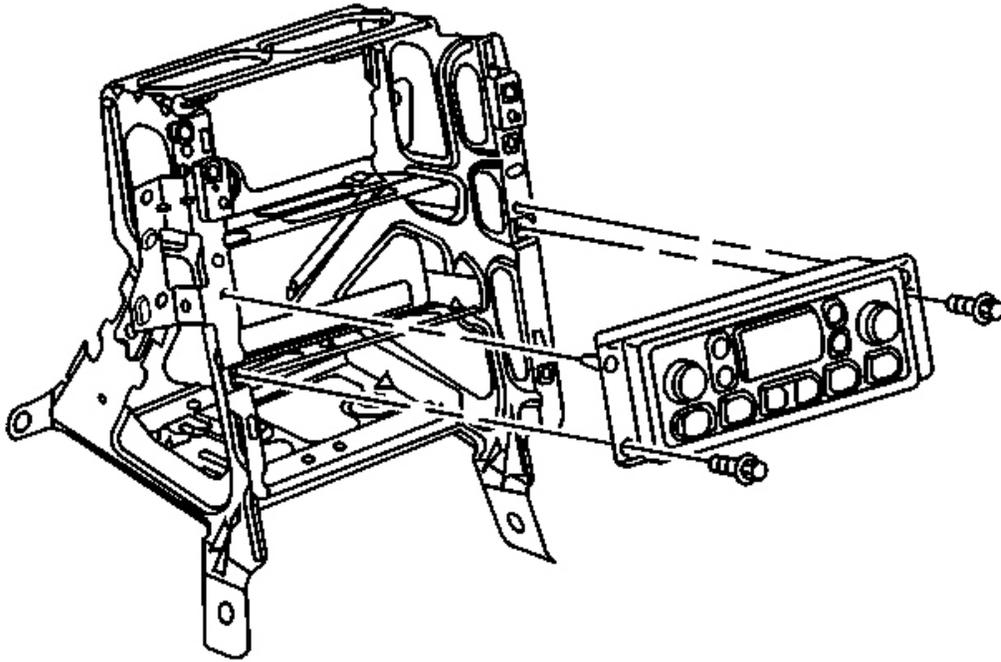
I/P Center Support Bracket, HVAC Control Module & Screws
